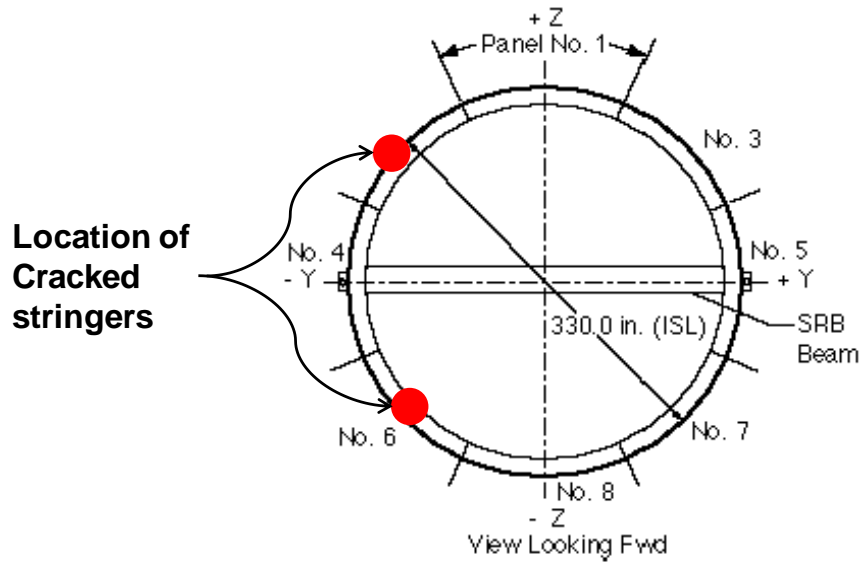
Cracked Stringers Locations Relative to the IT Circumference [ref. 2]
